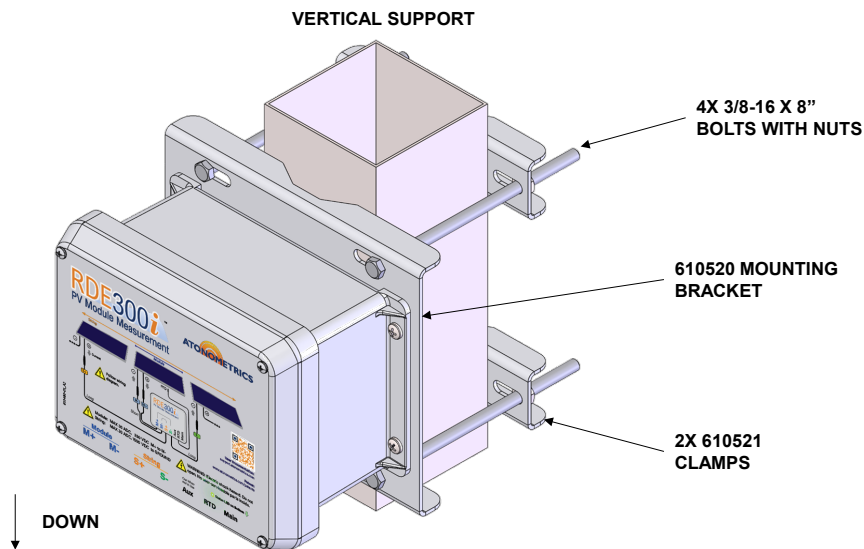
Mounting clamp kit (810303) used for RDE300i vertical mounting
